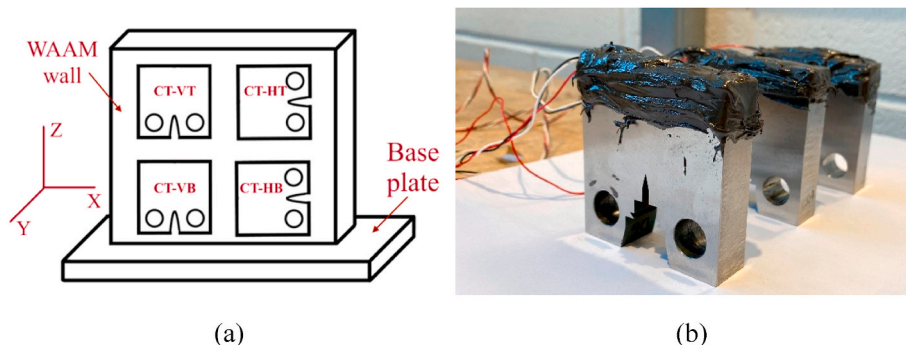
Specimens (a) extraction plan from the WAAM wall, (b) in protective coating after strain gauging.
